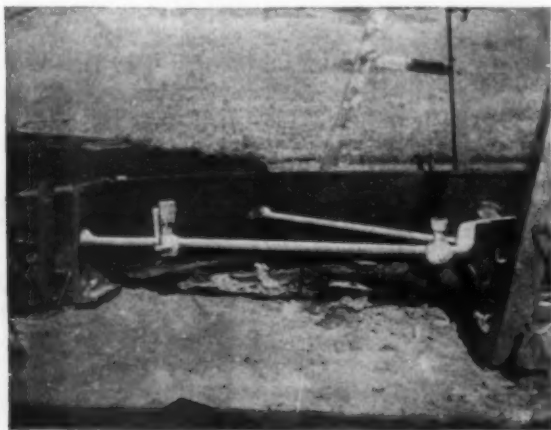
TWO WELDS OF SPOKE.
